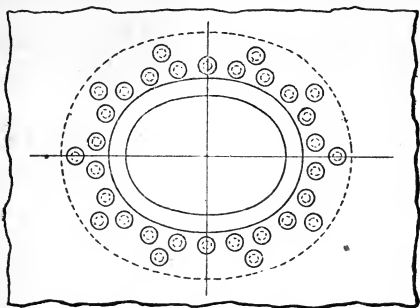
,962.—Method of riveting man-hole frames to shells or drums with two rows of rivets.
